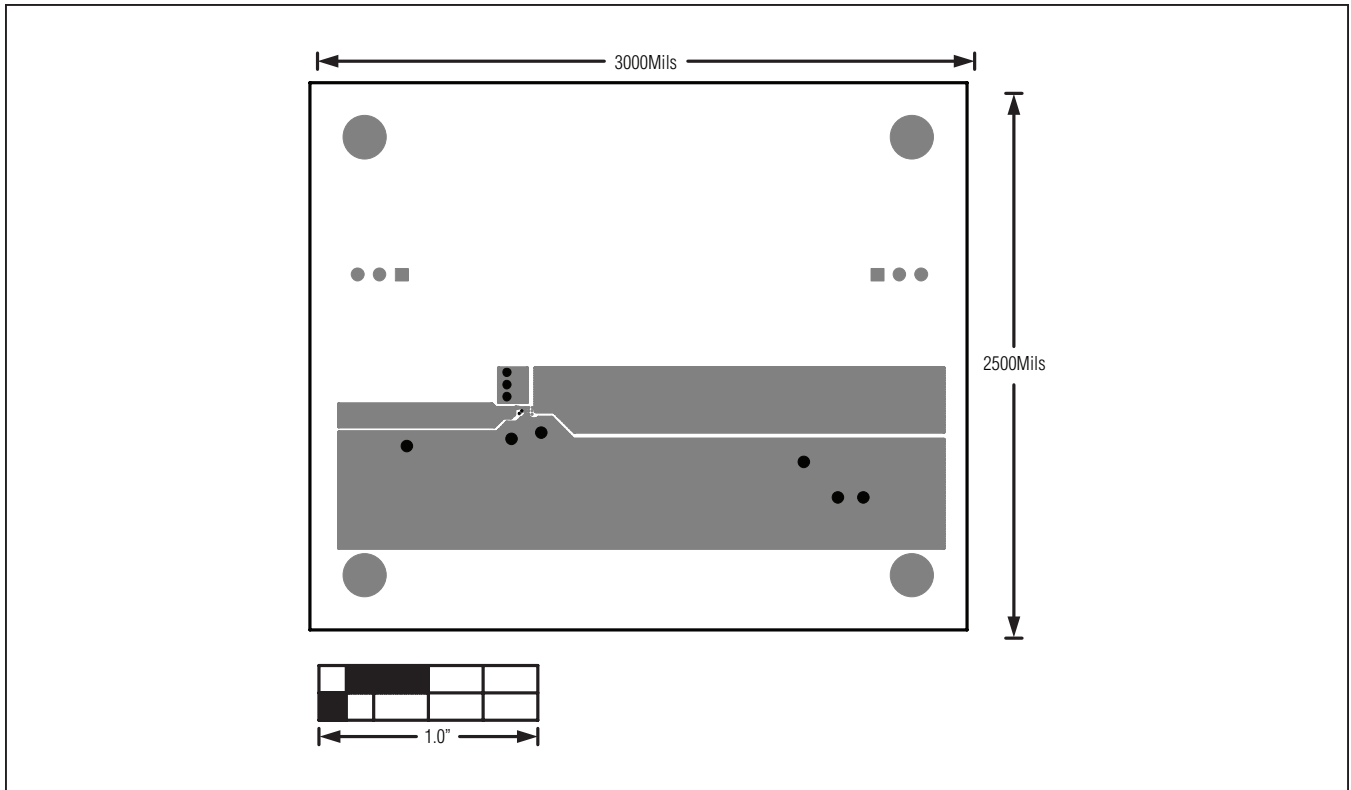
MAX8969 EV Kit PCB Layout—Component Side
